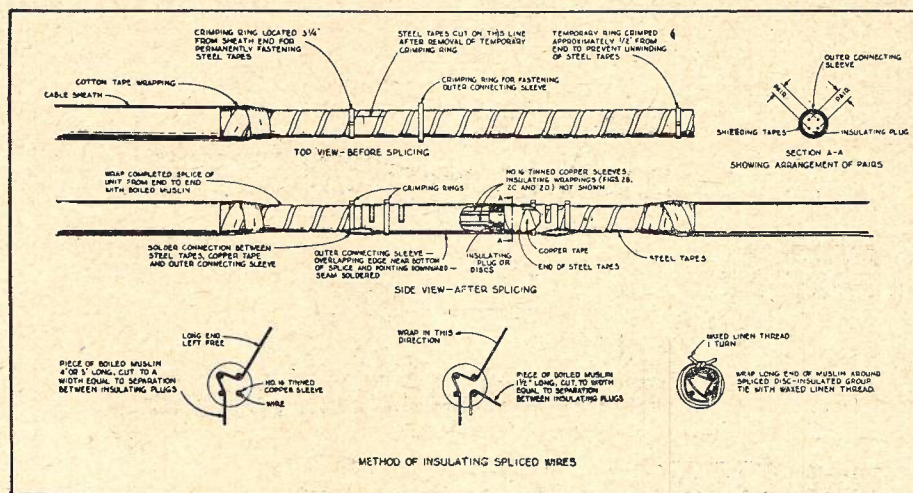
Method of jointing spiral—four disc-insulated cable.
